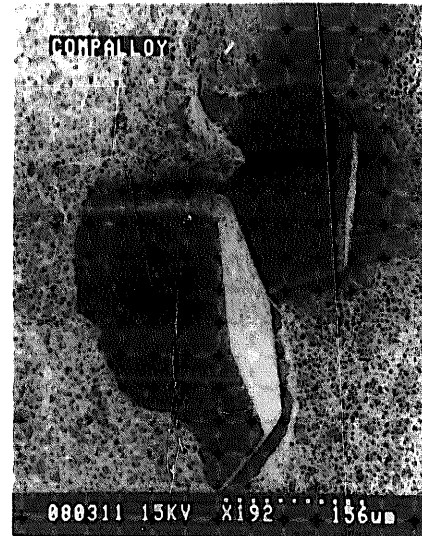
Typical fracture surface of the commercial electroformed diamond tools.
